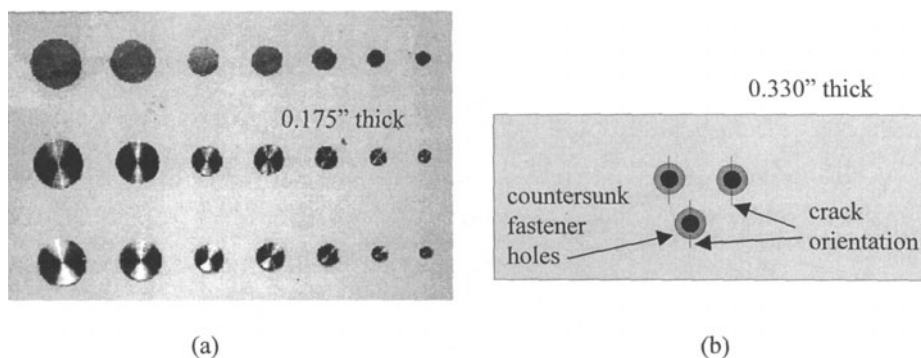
(a) Painted sheet of 7075-T6 aluminum prior to exposure and (b) diagram of a typical fatigue crack specimen, both before fasteners are installed.
